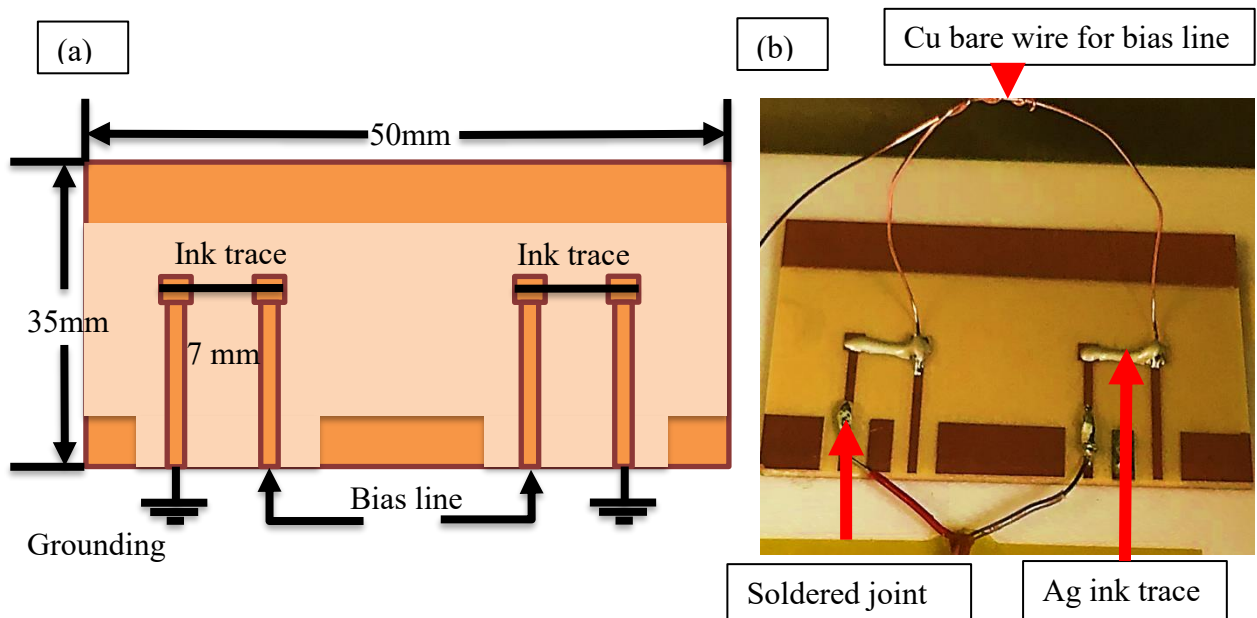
(a) Schematic diagram of PCB (b) Manufactured PCB for ECI testing.
